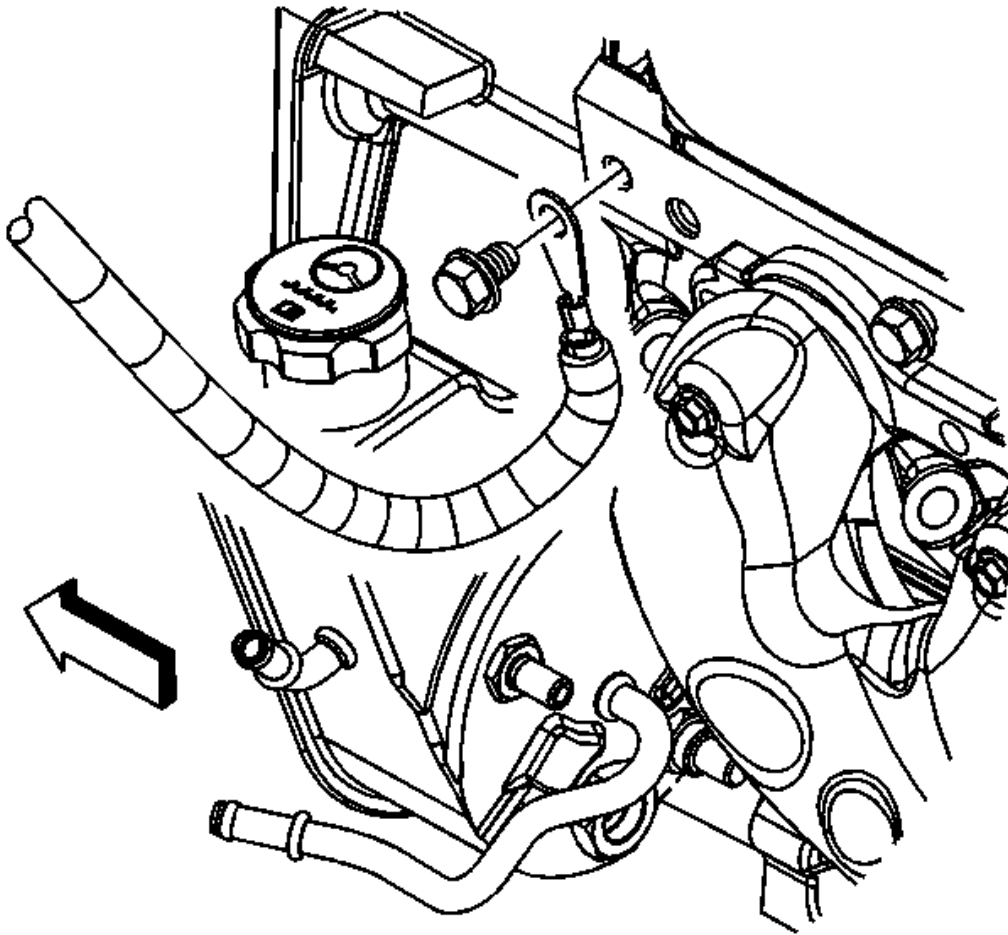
View Of Auxiliary Battery Negative Cable & Cable Ground Terminal Bolt
